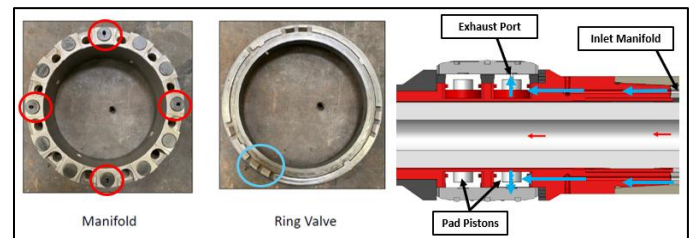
Series 2 RSS steering valve, inlet manifold, fluid exhaust ports and fluid path.
